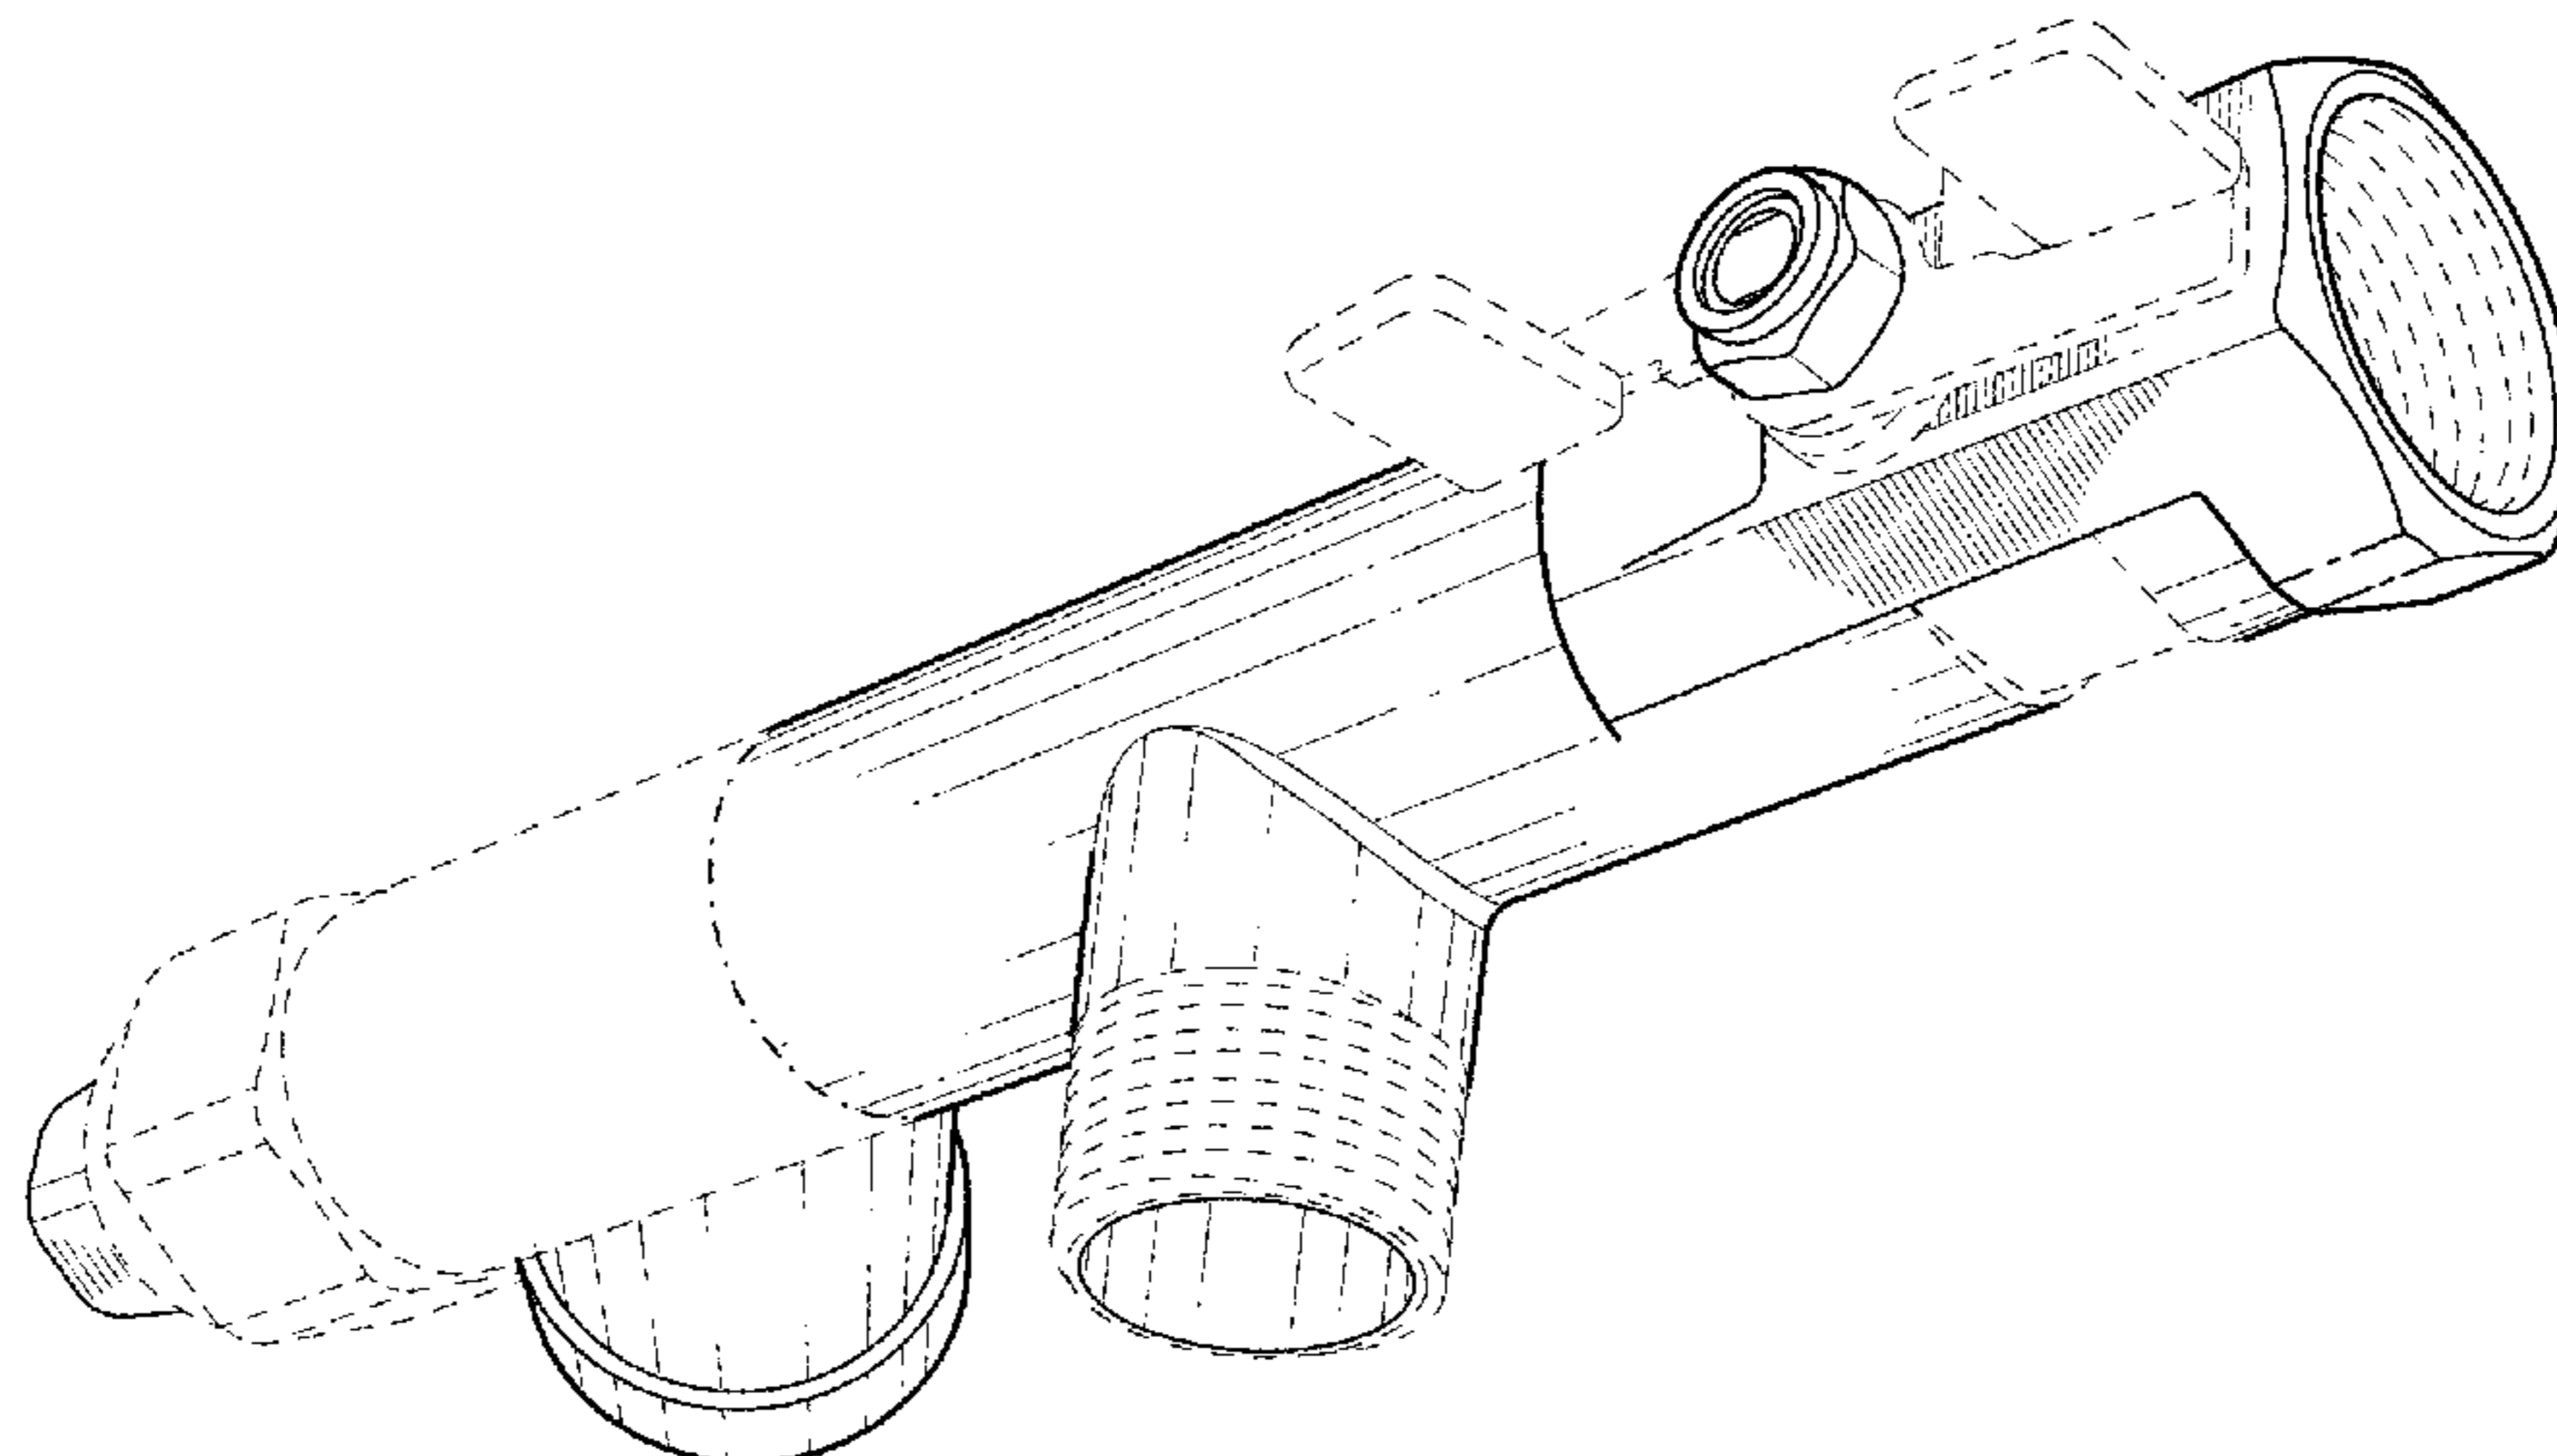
is a top front perspective view of a valve assembly showing our new design.
